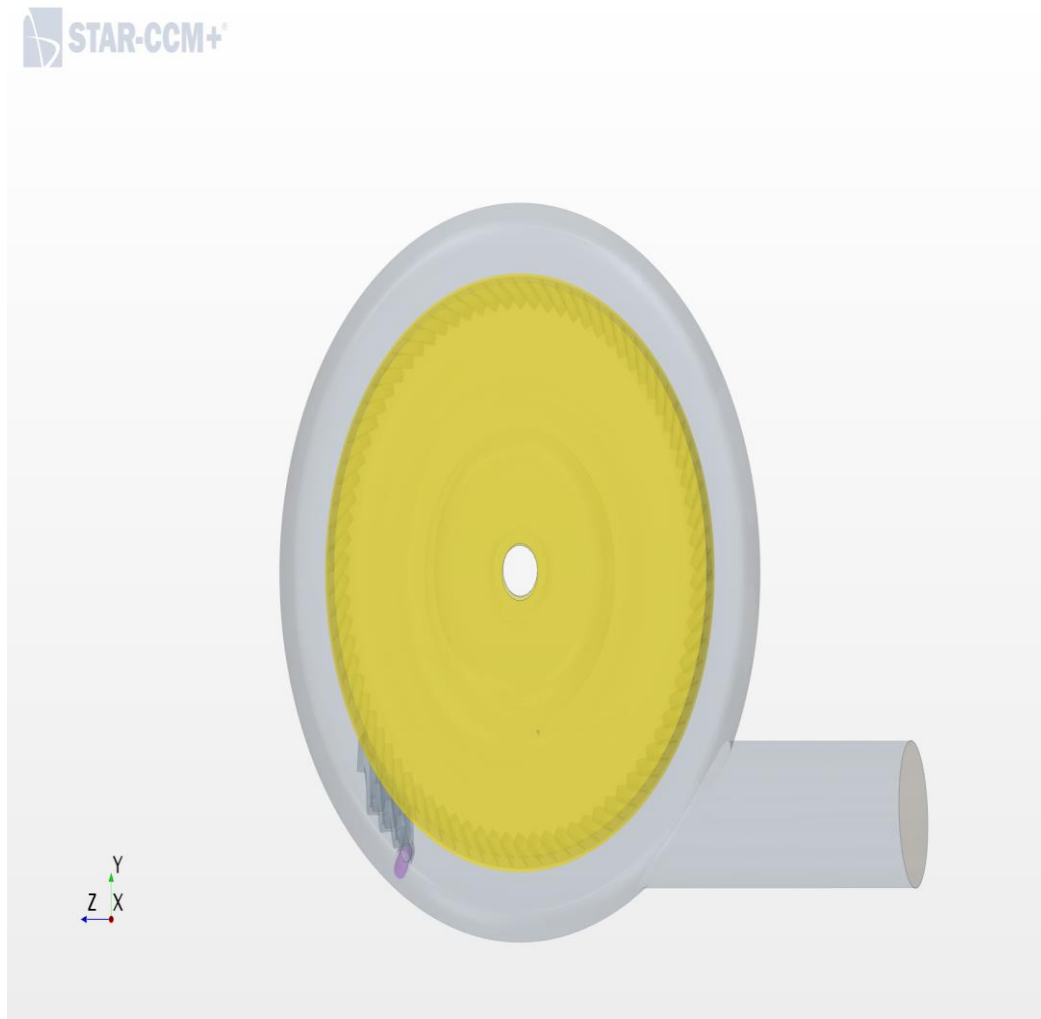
Transparent front view of the ZS-1 turbine CAD model with its components.
